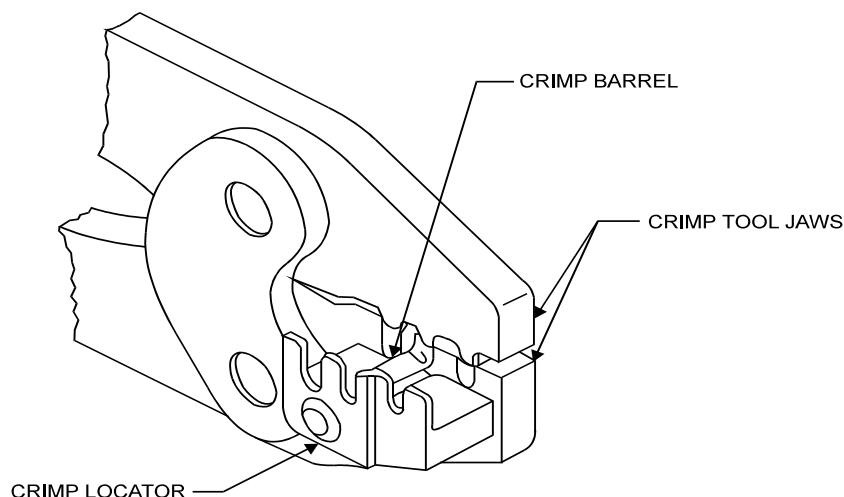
Insert Crimp Barrel into Correct Cavity of Crimping Tool
